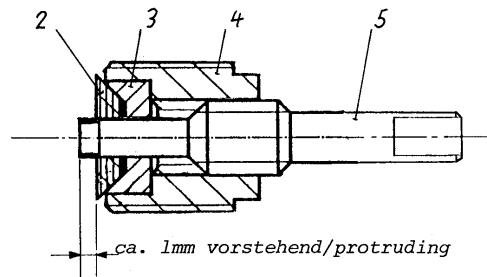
Preparing subassembly of the parts 2-5 of the purge valve.
